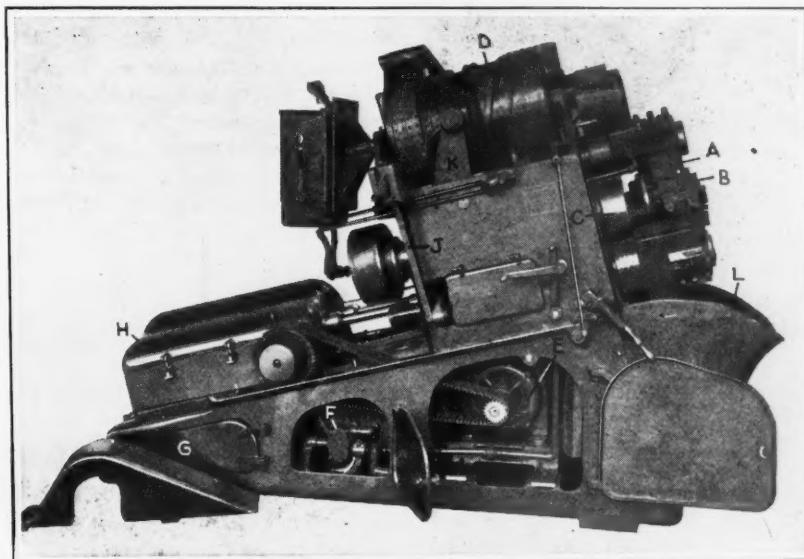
Hartness Automatic Lathe for Turning, Boring and Facing Operations, developed by the Jones & Lamson Machine Co.
